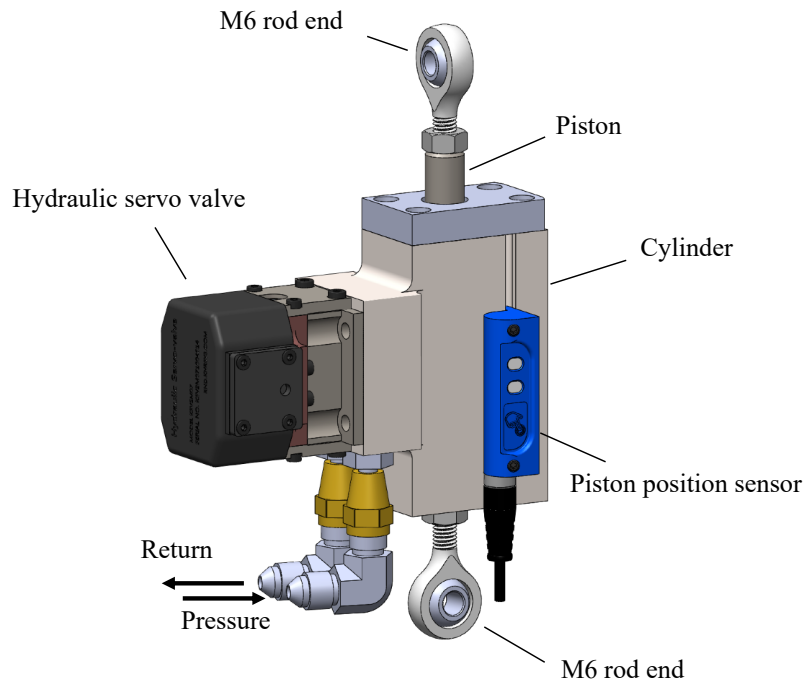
A drawing of the hydraulic servo actuator assembly
